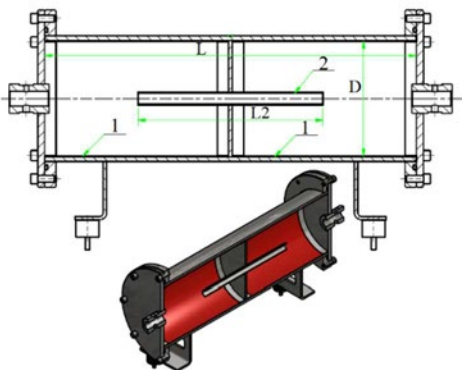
Chamber damper with internal baffle and choke tube used in the tests
